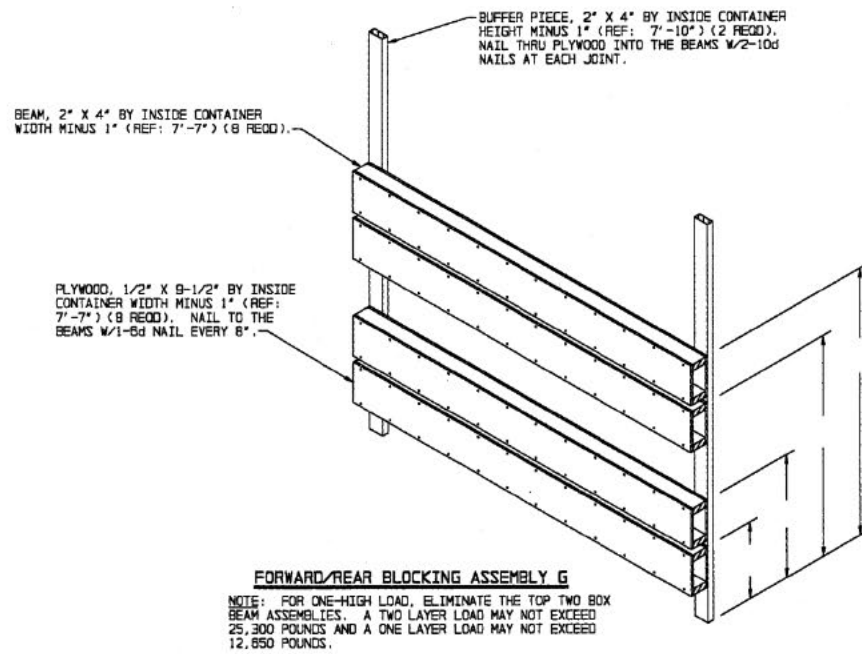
Examples of forward/rear blocking assemblies (sheet 1 of 2).
